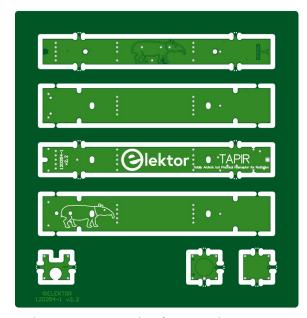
Bottom overlay of PCB Panel 120354-1 v2.2
